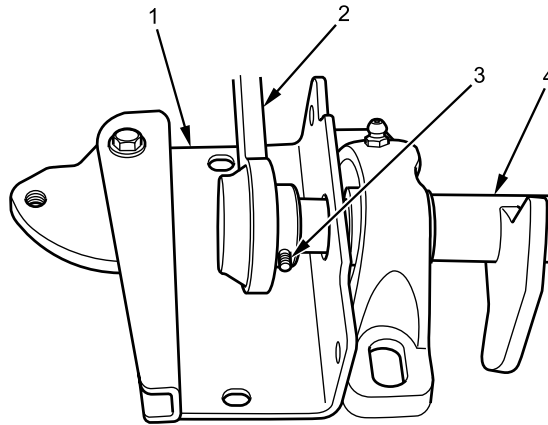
Exterior Handle Removed from Interior Handle Assembly.
